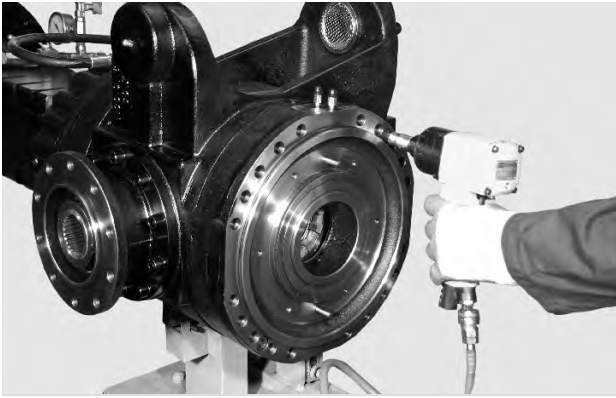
Loosen the fixing screws (29) in an alternate manner and remove them.
